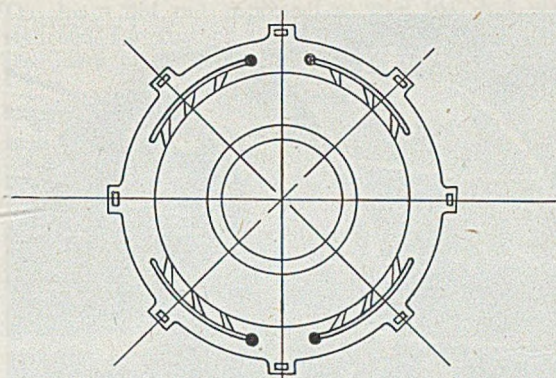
View of the Impeller Mould Bottom-joint Flange, showing the Main Ingates.
